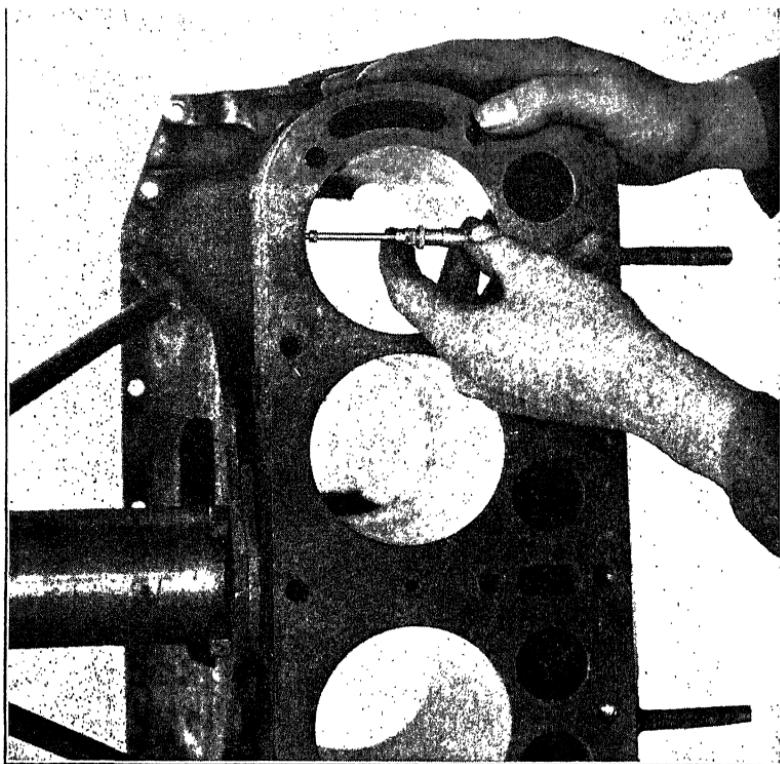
Using the Inside Micrometer to Determine Amount of Out-of-Roundness, Taper, Wear, or Oversize
